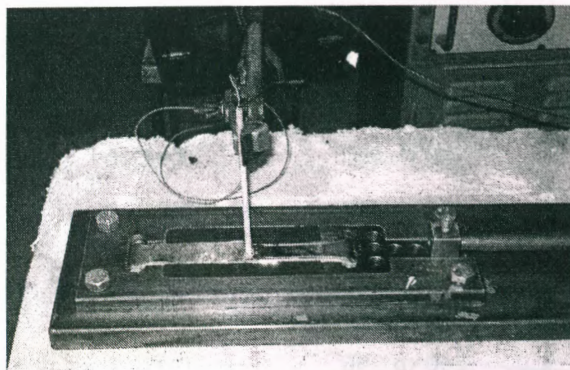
Frame measure with casting to Bocvar and Svidersky test
